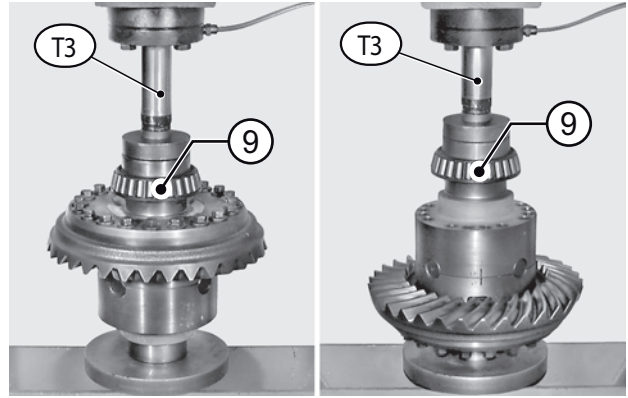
Position the differential unit under a press and fit it with bearings (9) using tool T3 (See drawing T3 p. 102).
